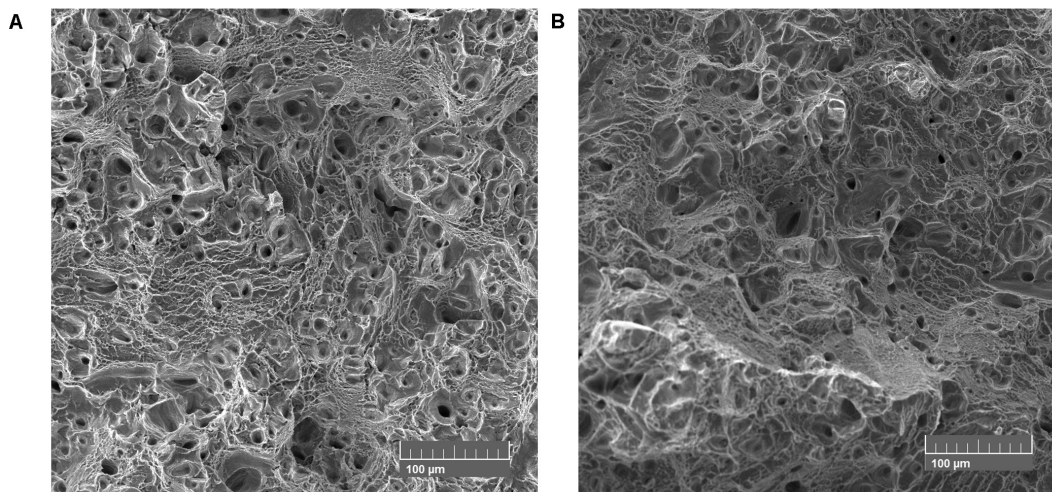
| Fracture surfaces of the Ti80 alloys produced with 4 h sintering at: (A) 1200°C and (B) 1100°C.
